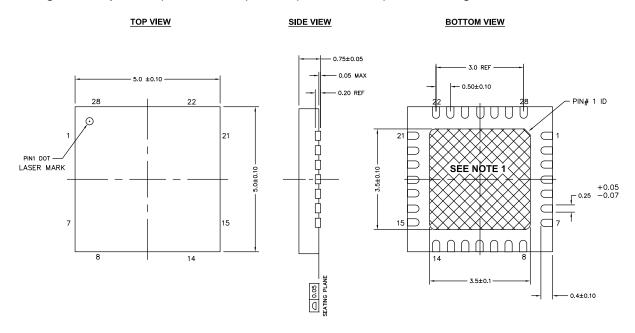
28-pin QFN (5 × 5 × 0.8 mm), LT28A (3.5 × 3.5 E-Pad), Sawn Package Outline, 001-64621
